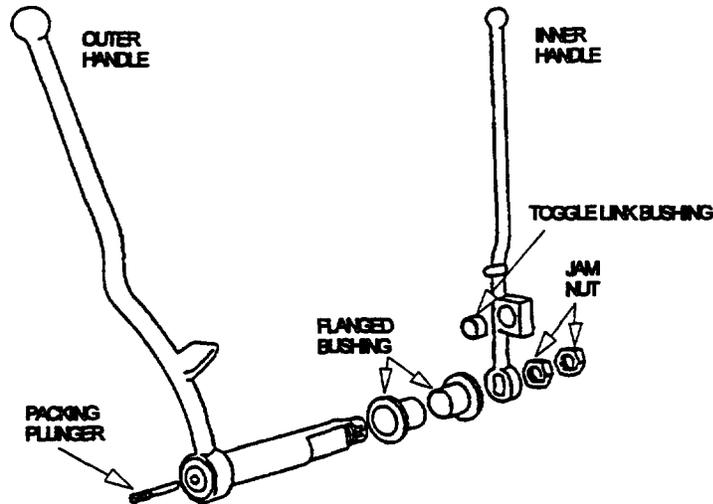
Quick-Acting Operating Handle Assembly (Left-Hand Shown)
